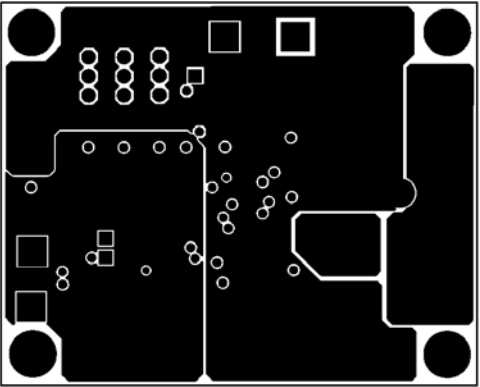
Middle Layer2 of Evaluation Board PCB Layout
